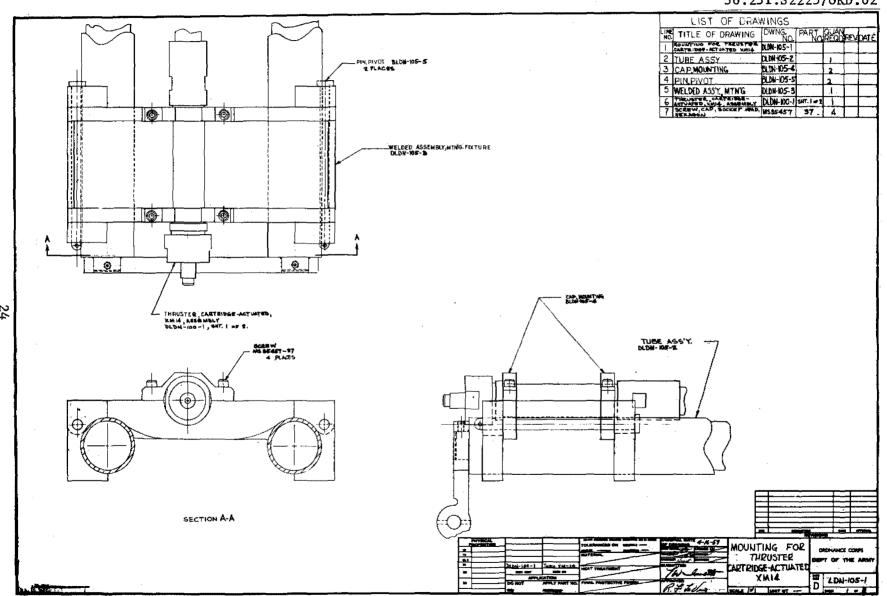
Mounting for Thruster, Cartridge Actuated, XM14
